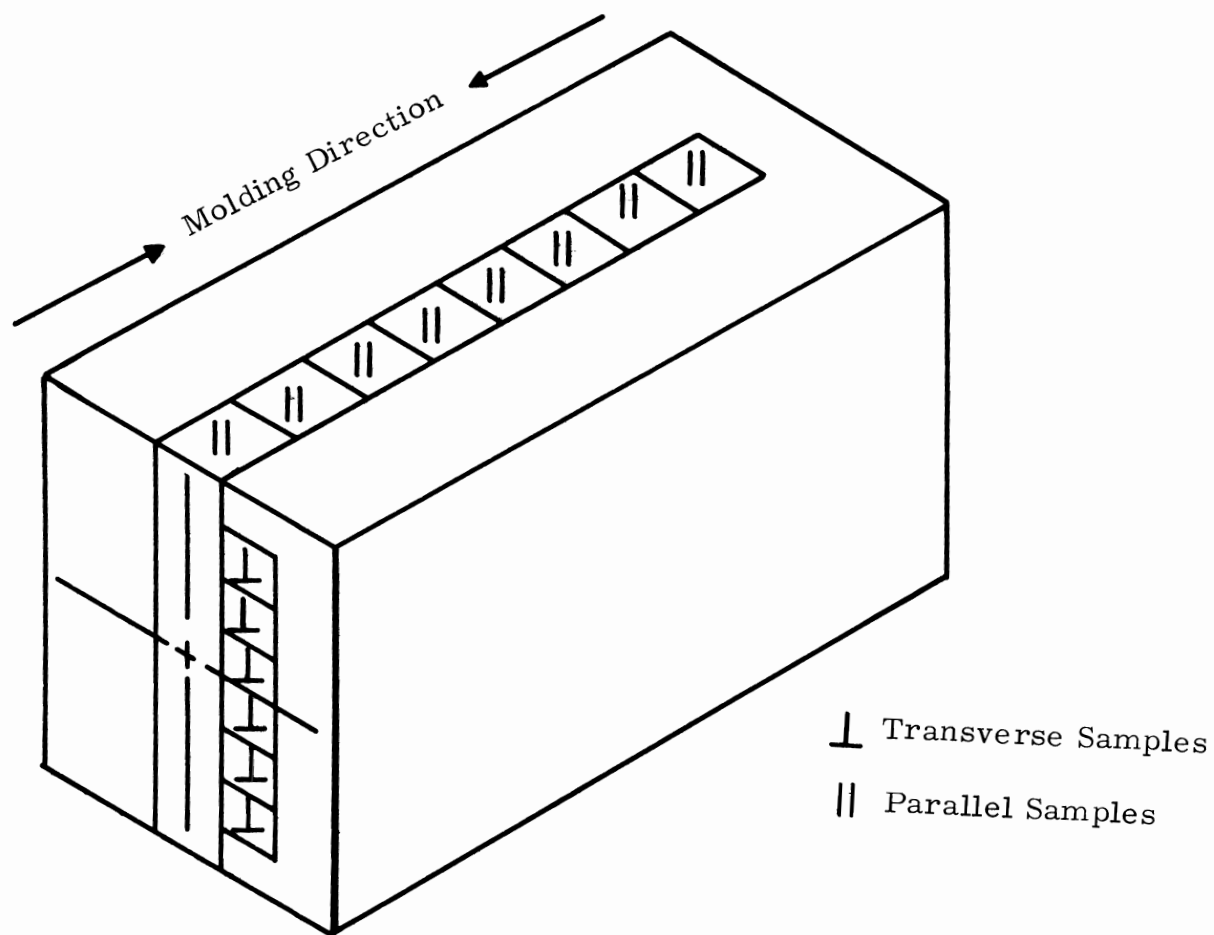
Sampling Scheme - Rectangular Molding
